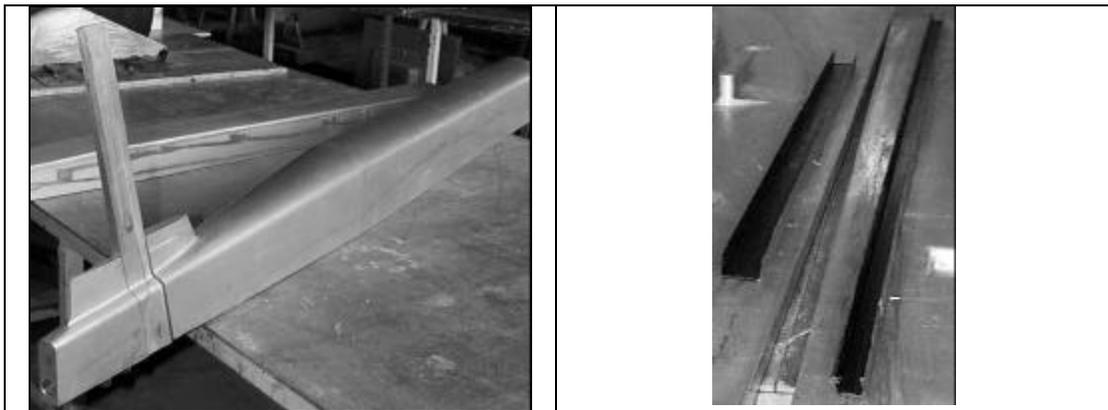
Fuselage skin tool and the unidirectional wing spars
